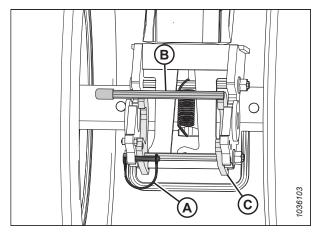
Left Transport Wheels – Rotation Lock Latch Disengaged
